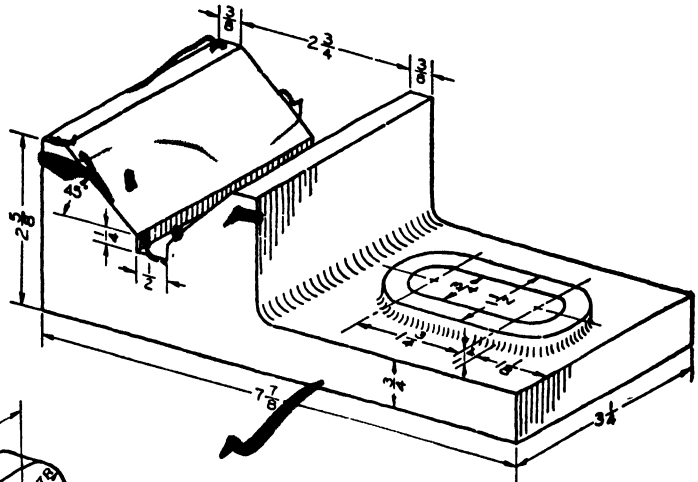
Prob. 134. Draw three complete views of the V-block base.
